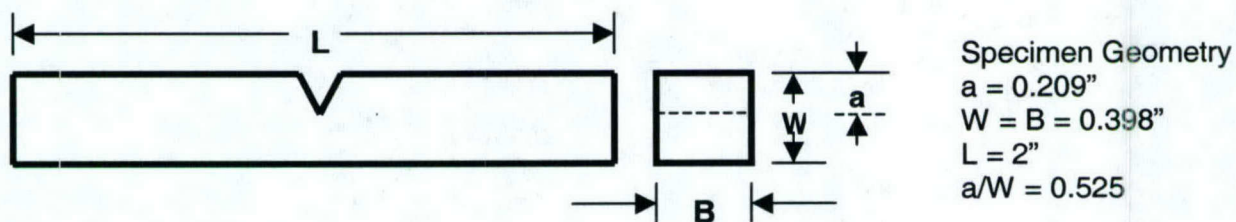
Square Bar Stress Corrosion Cracking Test Specimen
